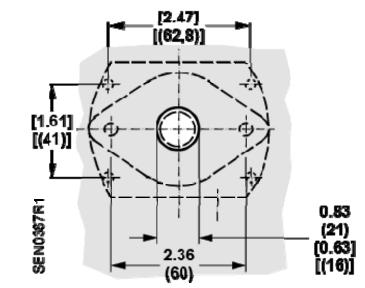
Drilling Template with [without] Mounting Flange in Inches (Millimeters).
